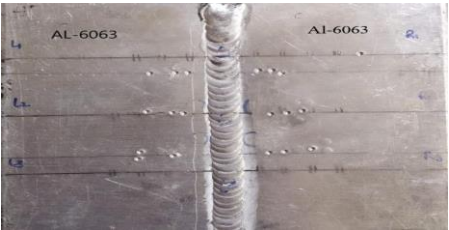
Rockwell Hardness Test on Weldment AL-6063 & Al-6063
